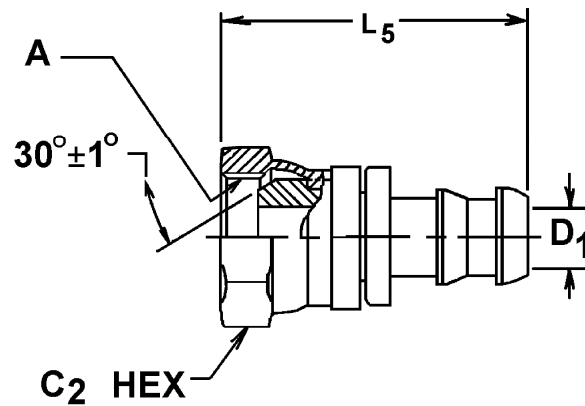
SWIVEL FEMALE PIPE THREAD PUSH-ON HOSE FITTING
